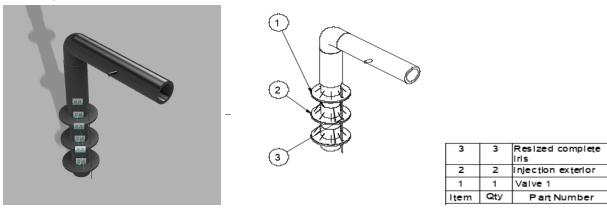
(left): assembly CAD. Figure 17 (right): assembly sketch
